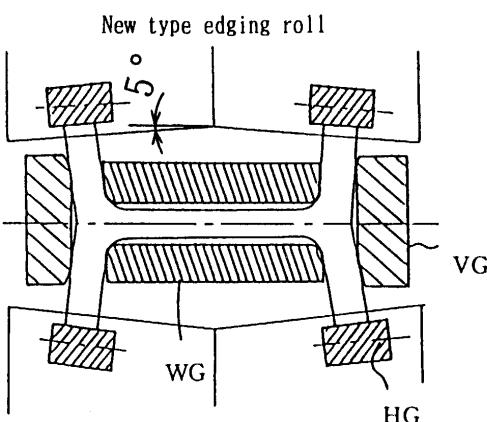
Guiding facilities of new type grooveless edger rolling.
